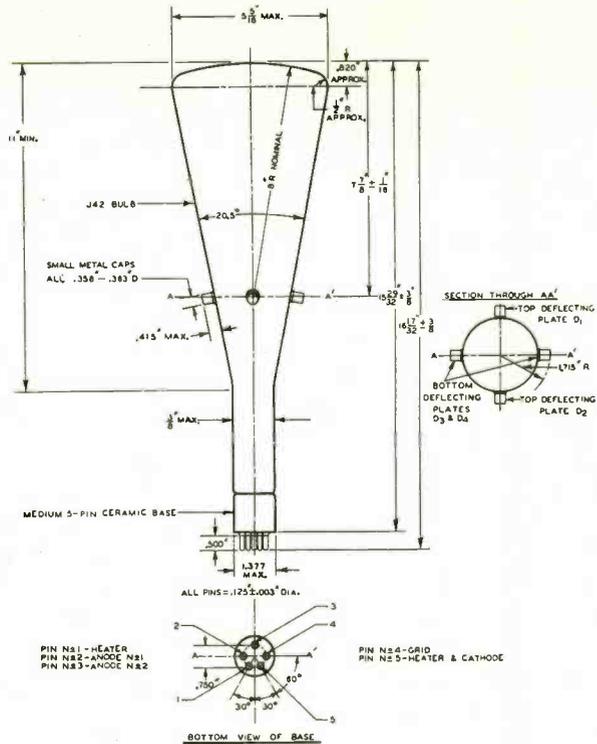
Outline drawing of the Type 907 cathode-ray tube. Bottom view of base is included, with pin designations.
